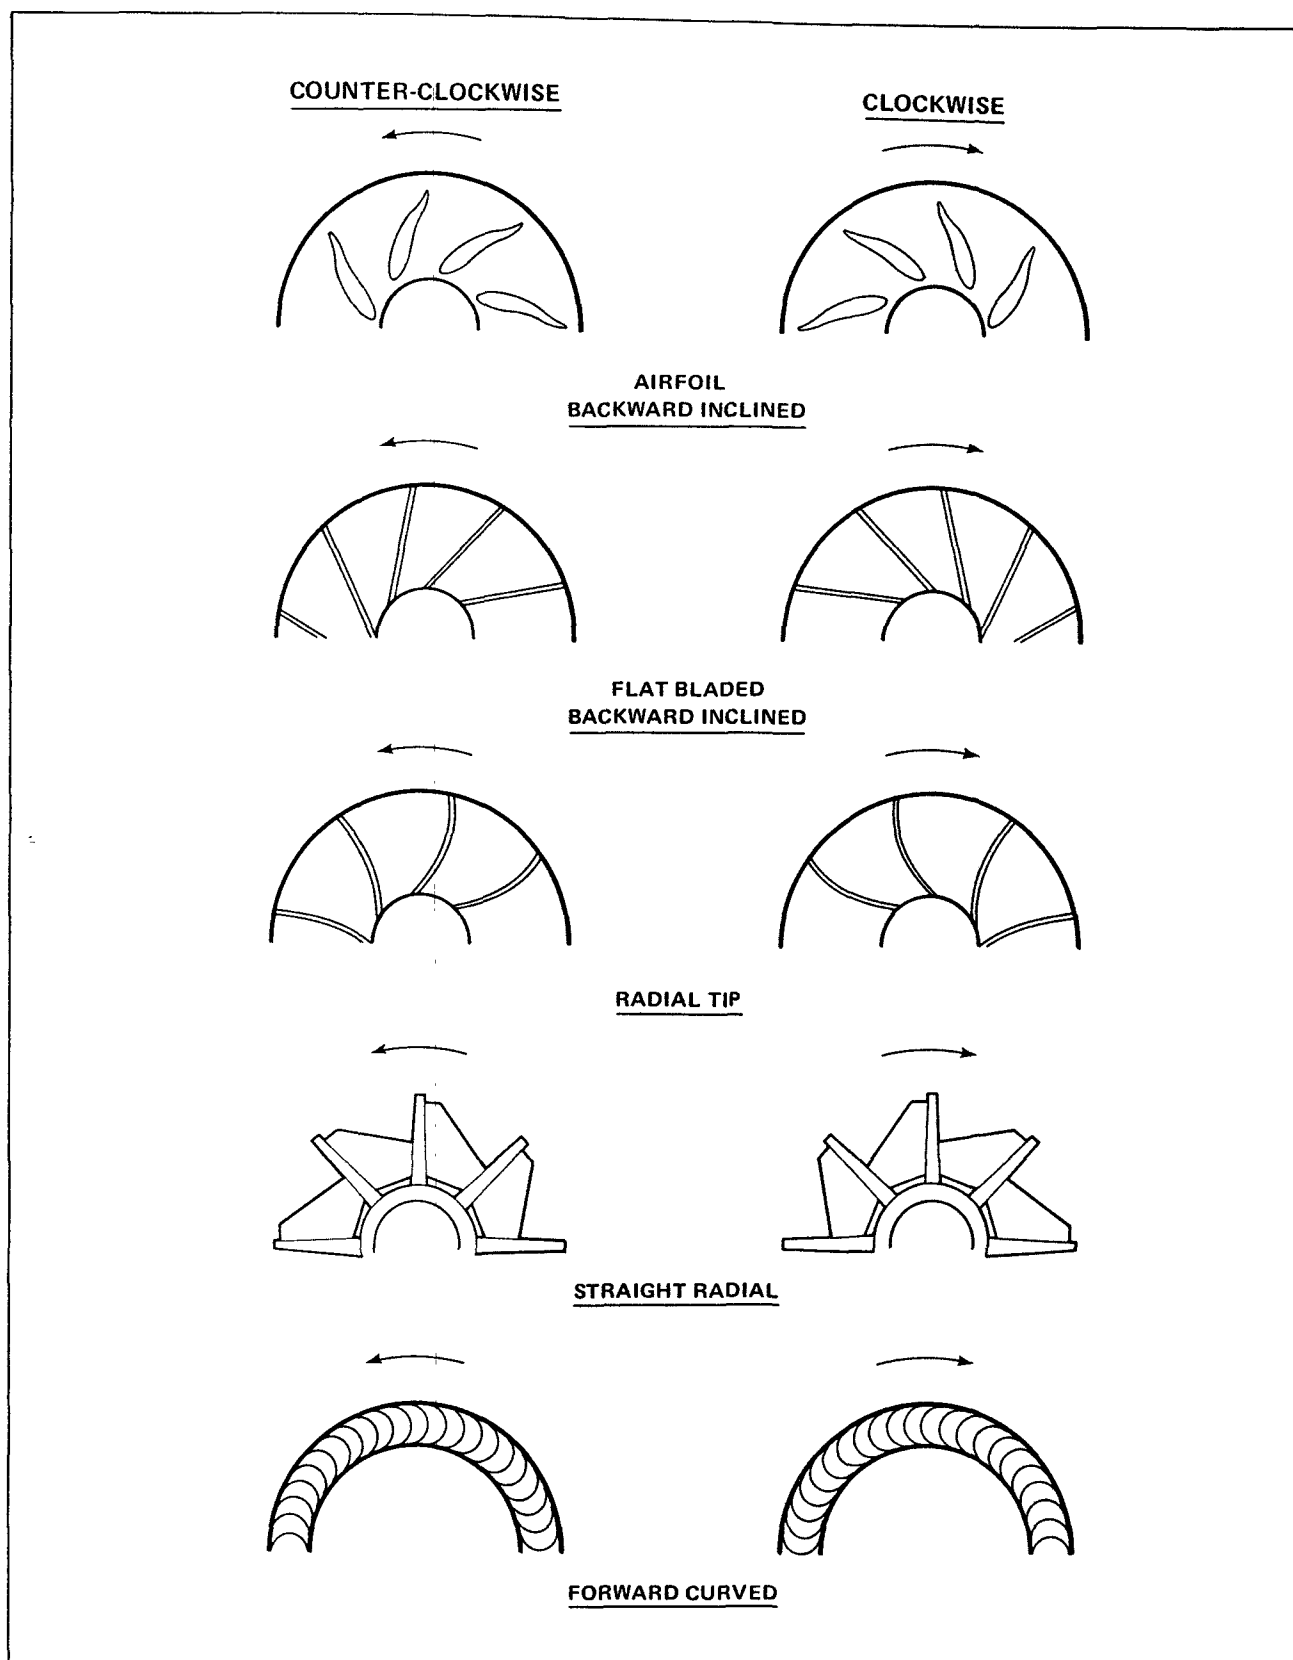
Wheel Blade Types and Rotation
